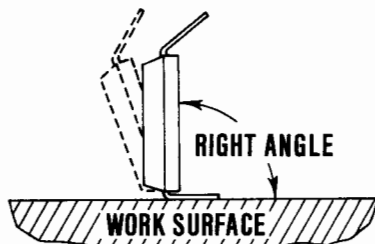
HOW IC PINS ARE PREFORMED so they are perpendicular to the body before the device is mounted on the PC board.
